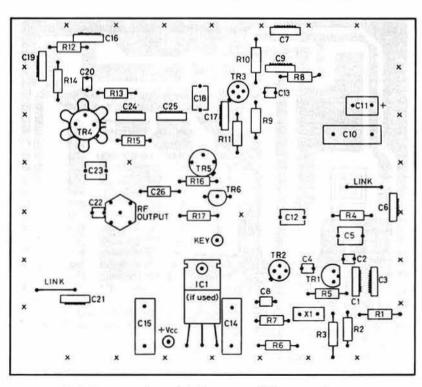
Component layout (x indicates worm joining top and bottom earthplanes)
